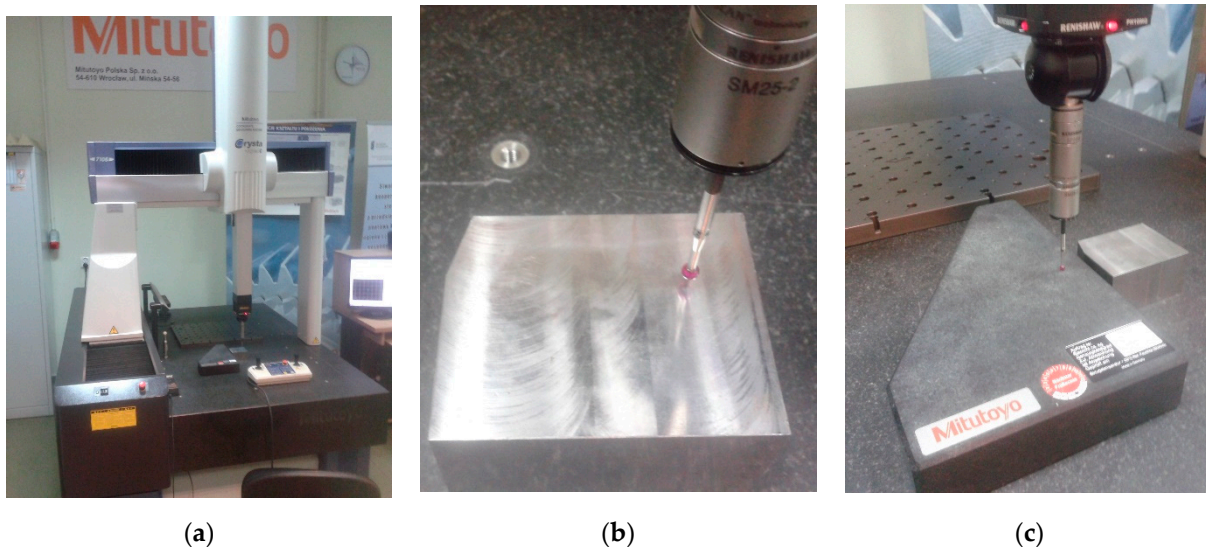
Experimental setup: (a) CMM Mitutoyo Crysta-Apex C7106; (b) Sample 1, steel machined by face milling; (c) Sample 2, granite standard of a right angle made by Mitutoyo.
